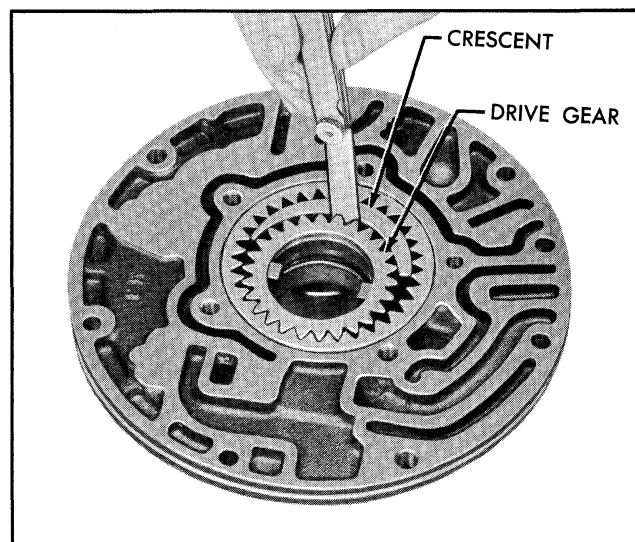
B-107 Checking Drive Gear to Crescent Clearance
